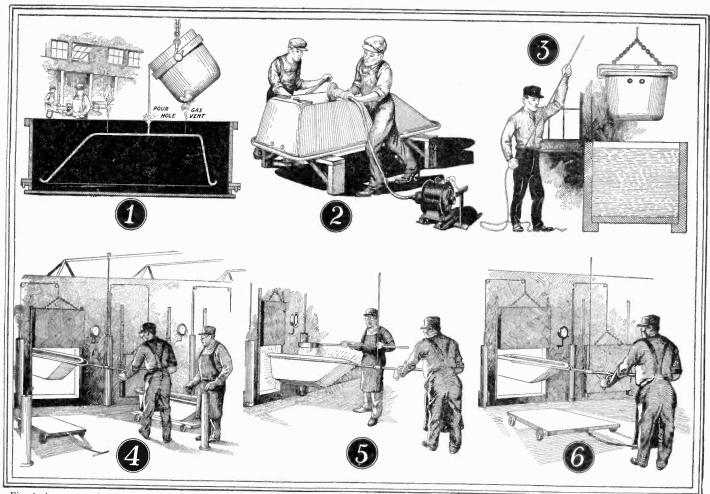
shows a sectional view through iron tub flask together with sand, two gas vent holes and pouring hole in center, with large ladle of molten iron being poured into the latter. Fig. 2 shows tub upside down with one operative using file, while second man uses flexible shaft emery wheel to grind down and finish rough iron tub. Fig. 3 shows section of pickling solution vat with tub being lowered into it for purpose of cleaning thoroughly electric pyrometers, etc. A man is shown operating an air valve, also another man with leather apron and large boom about to place iron tub in oven. Fig. 5 shows red hot tub removed from oven, and one operative sifting enamel powder over the tub. Fig. 6 shows tub being replaced in oven so as to fuse and bake on enamel.
